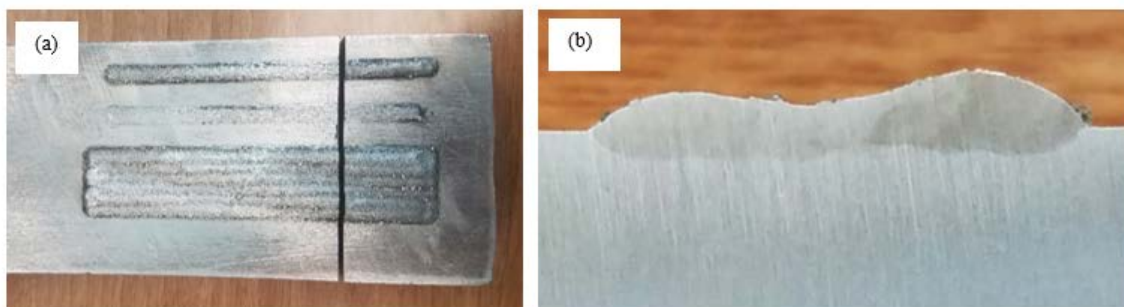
(a) test run deposition tracks (b) weld pool fusion.
